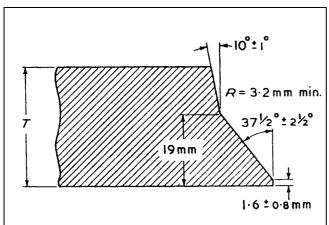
Welding end for wall thicknesses greater than 22.2 mm
